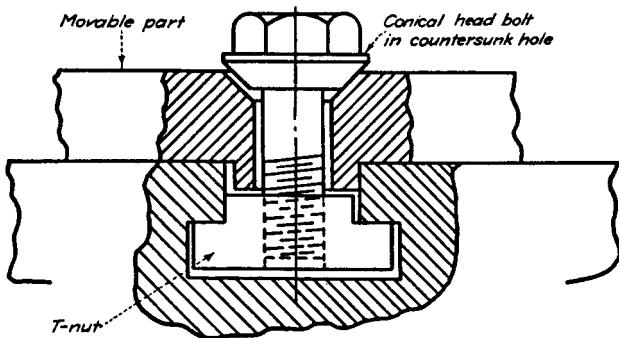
The movable part is held against one side of the groove while the T-nut is forced against the other side. The removal of the screw permits easy removal of the clamped part. Heavy pressure toward the side of the key out of contact with the slot can permit slight movement due to the springing of the screw.
